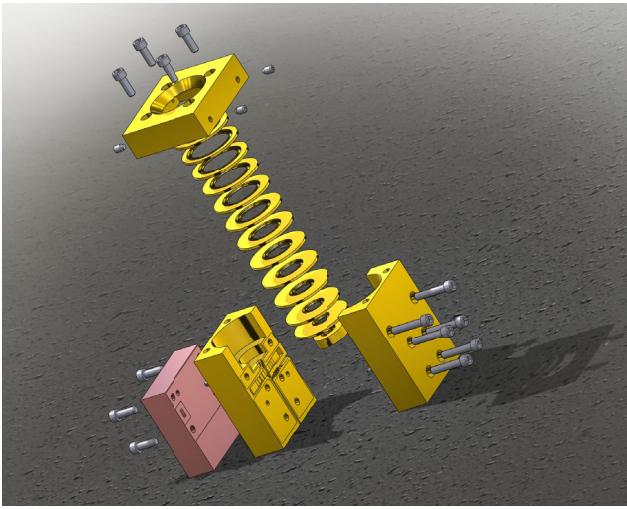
CAD rendering of exploded assembly of tri-frequency feed horn and triplexer.
